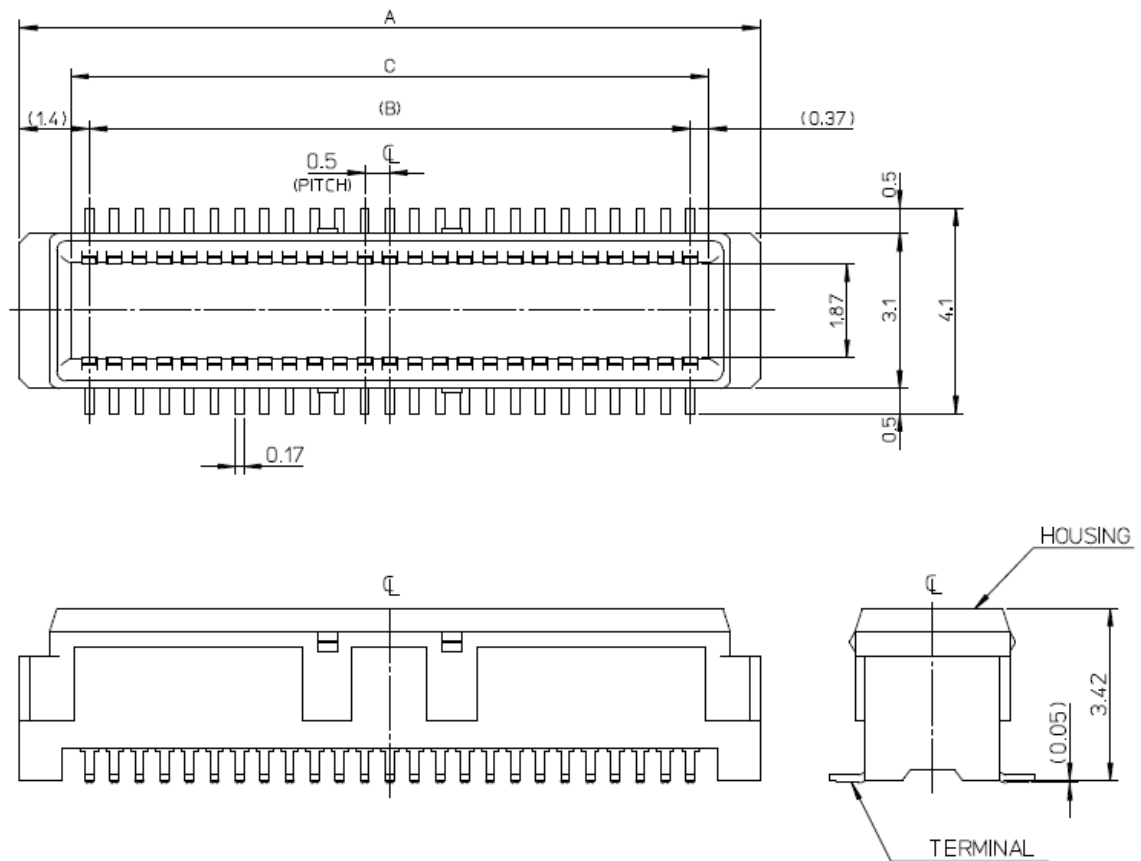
Molex Board-to-board connector dimensions. 501920-5001
